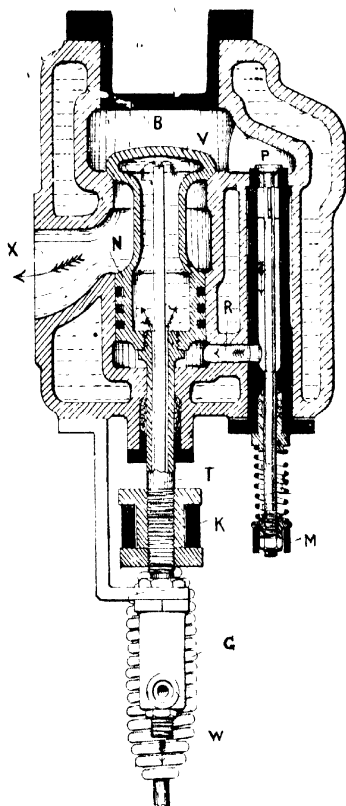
Gossley water-cooled exhaust valve with balancing piston and pilot valve.
